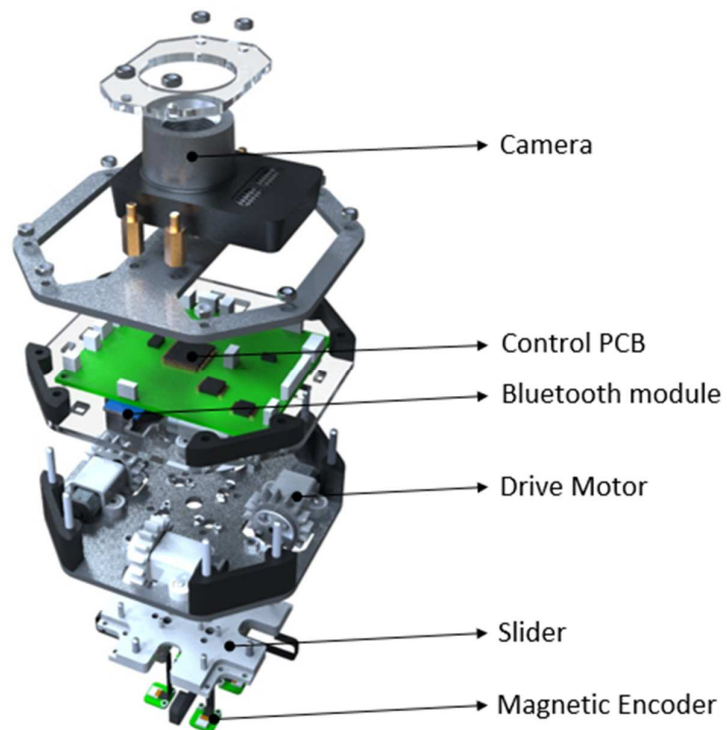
Exploded view model of SCALA surveillance agent, showing its several components.
